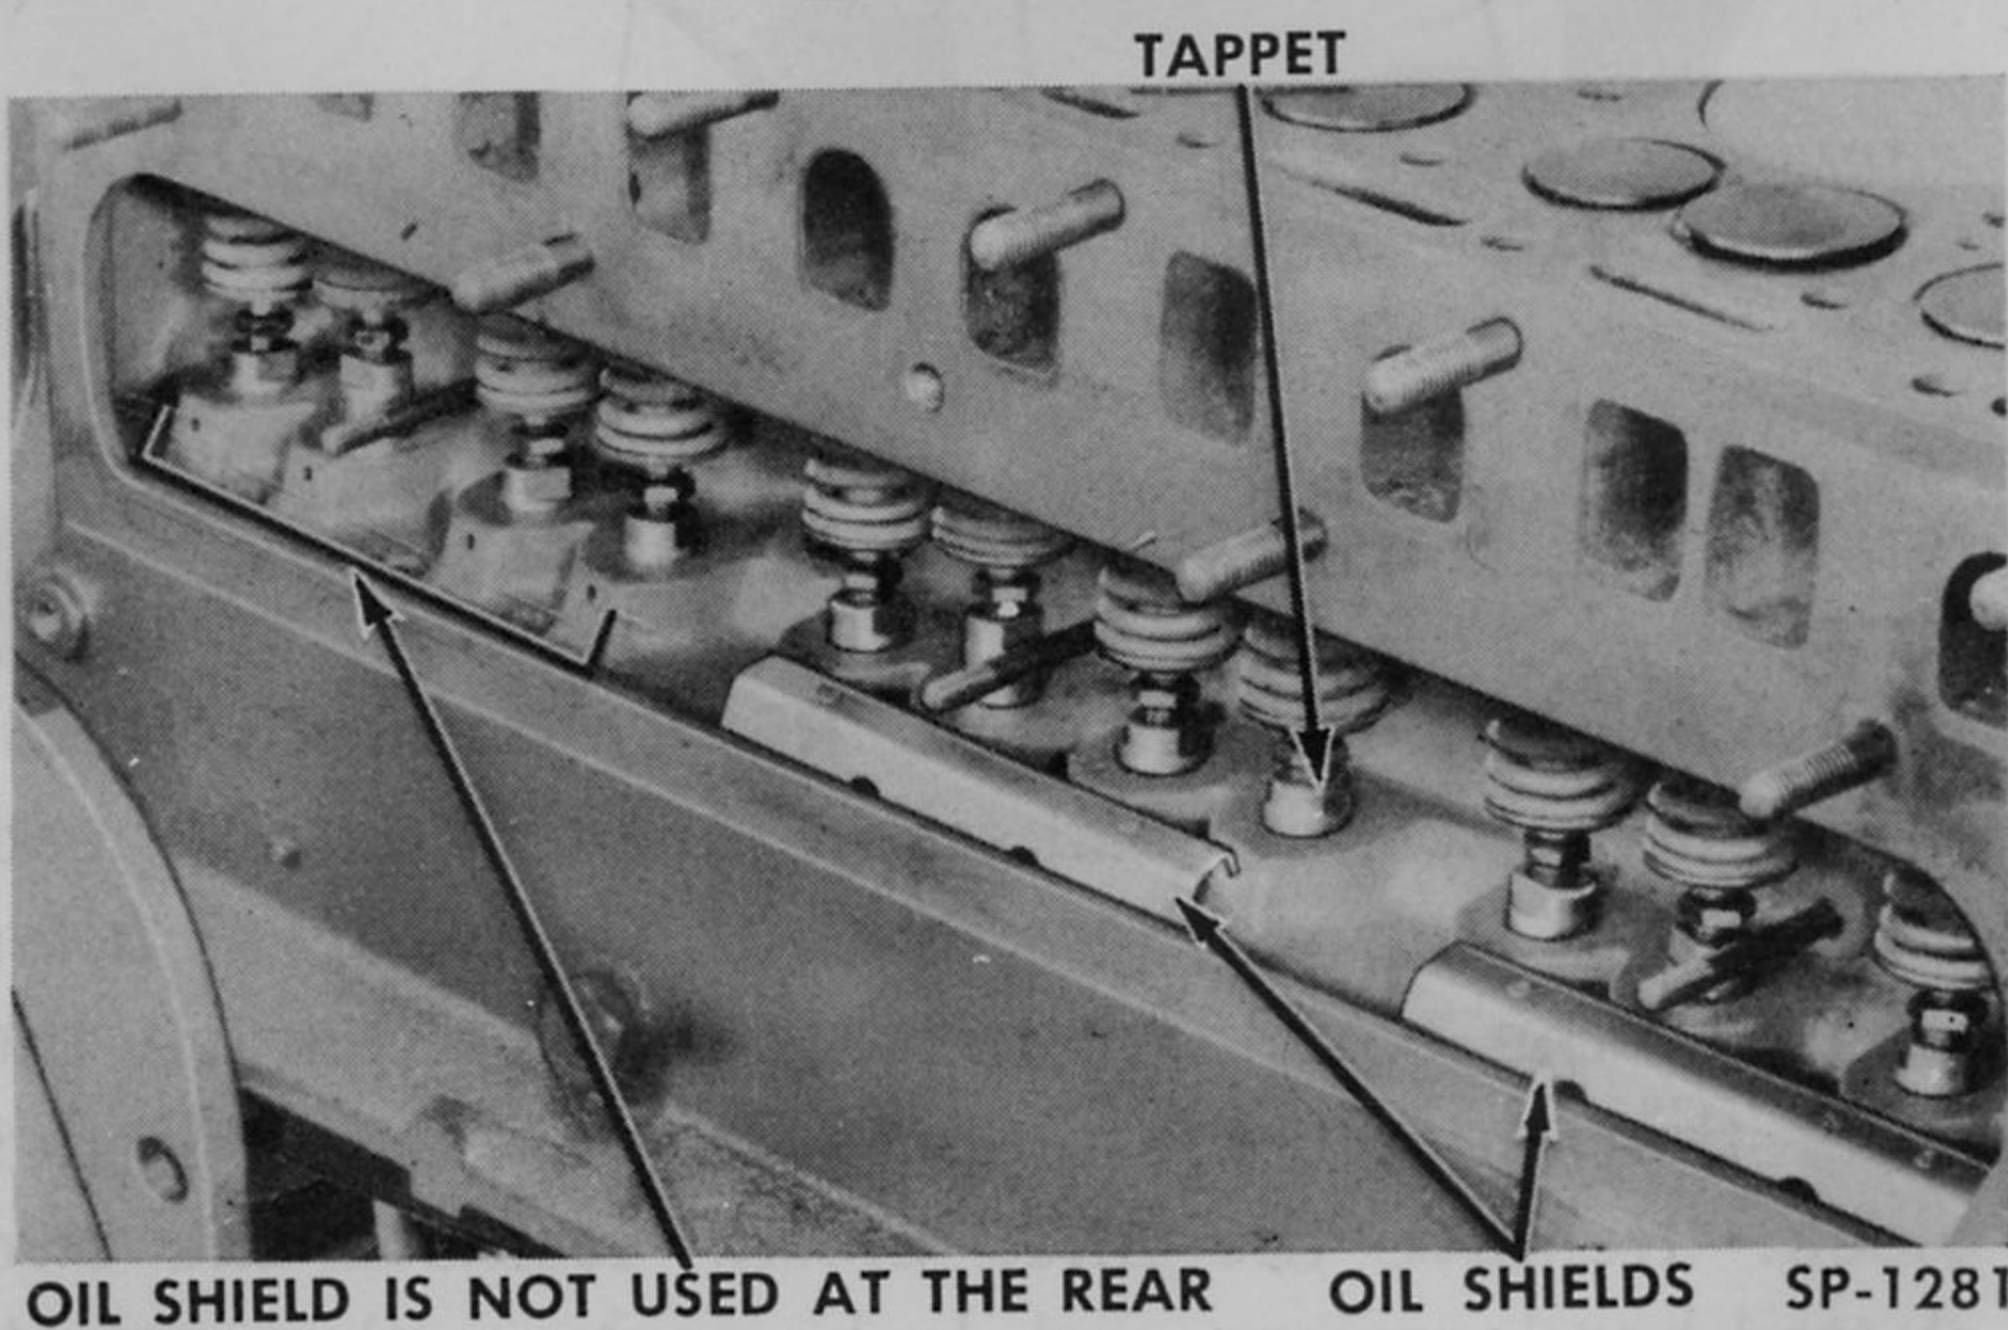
Valve Tappet Chamber, Tappets and Oil Shields
